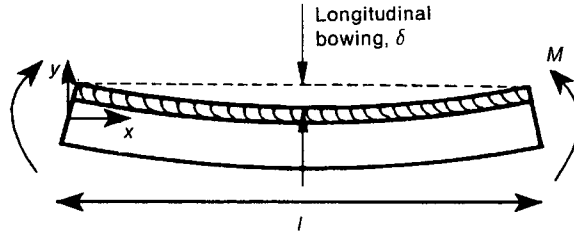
Illustration of longitudinal bowing of a butt weld.
